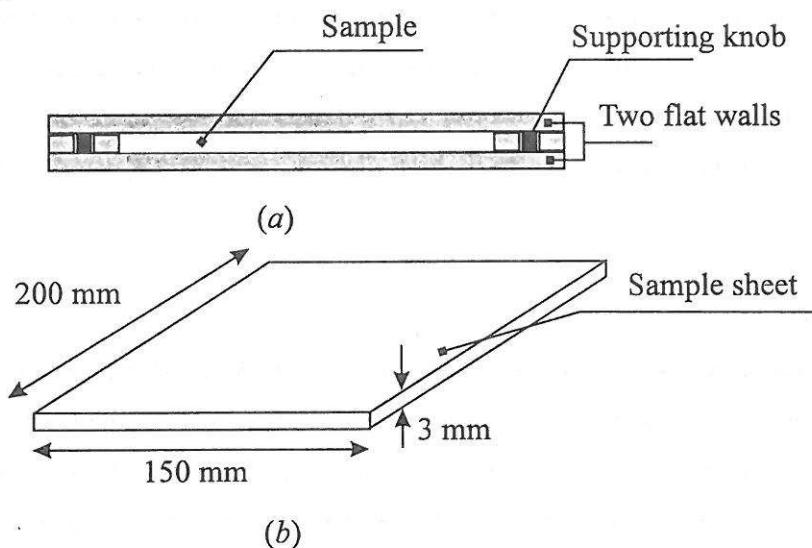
Experimental for cooling a molten sample contained (a) Cross-sectional compression mold (b) Sample sheet for testing.
